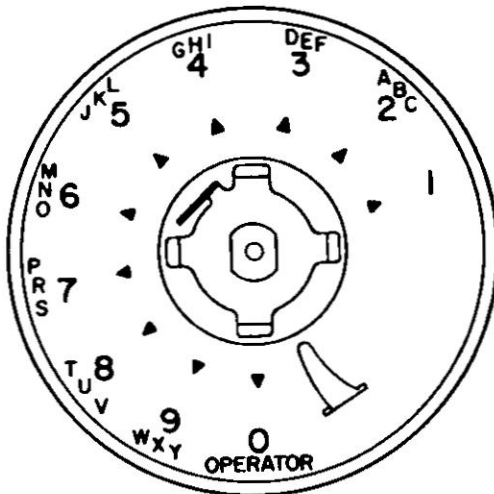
Proper Position of Clamping Disc When Installing A.E. Co. D-780896-A.
